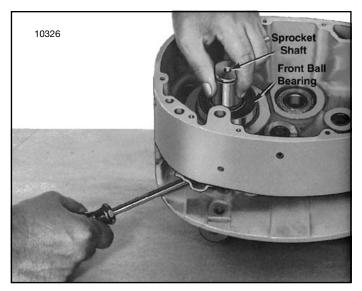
Removing Sprocket Shaft and Front Bearing
